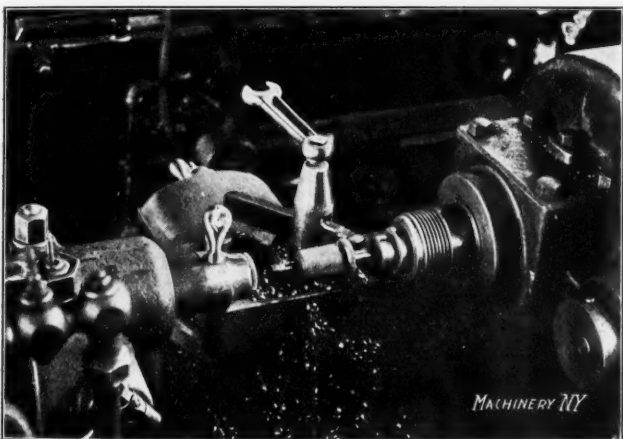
Special Mandrel used to hold Reverse Plate Gear Bushing
